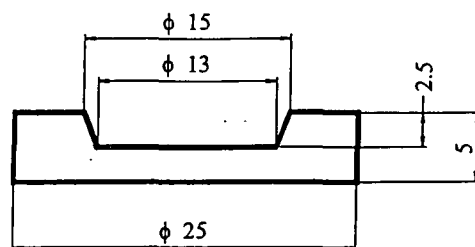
Geometry of the formed piece (dimensions in mm).
